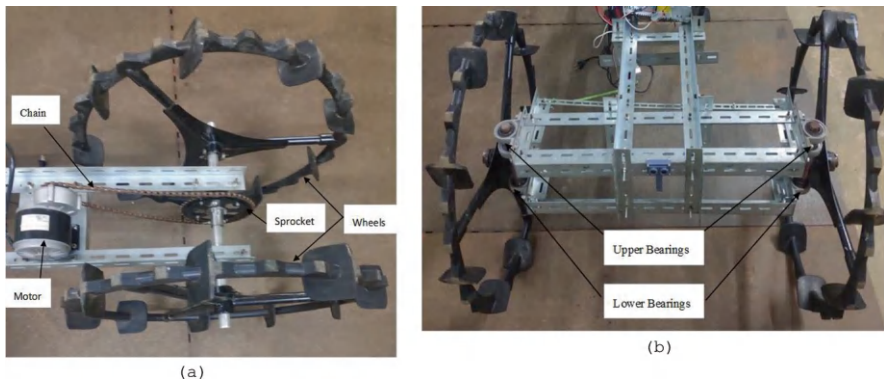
(a) Assembly of the rear part and (b) Assembly of the front wheels
